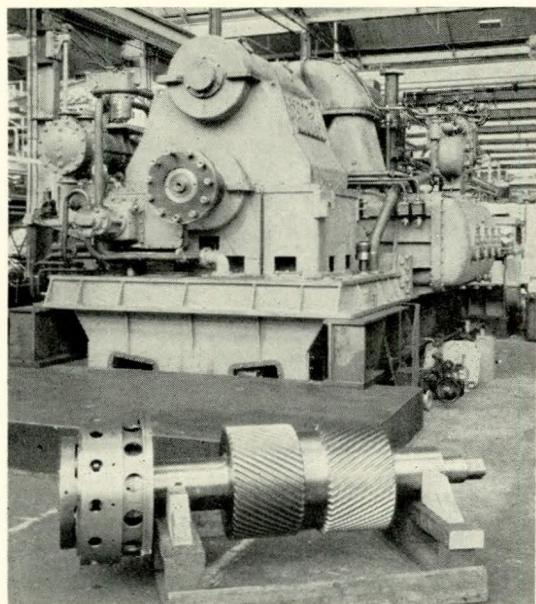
Turbine and double reduction gear for the pump of a suction dredger
